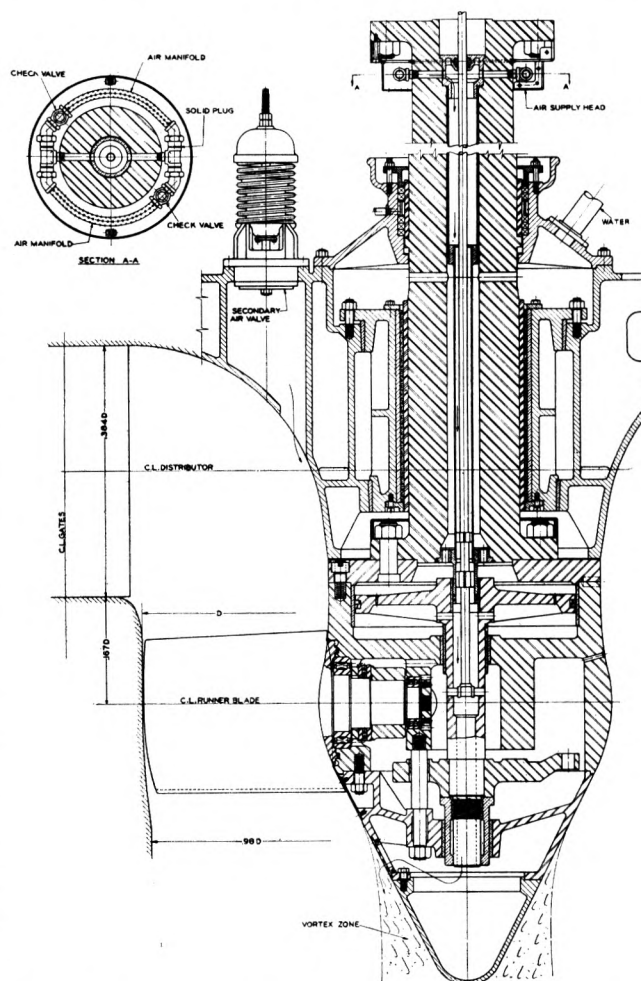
SECTIONAL VIEW SHOWING ARRANGEMENT FOR AUTOMATIC ADMISSION OF FREE AIR TO DRAFT TUBE
